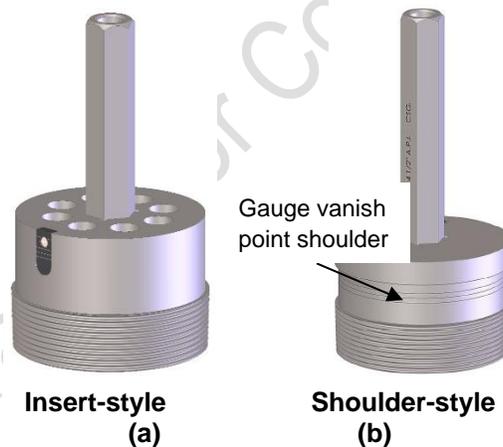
Insert and Shoulder Style Standoff Plug Gauges
